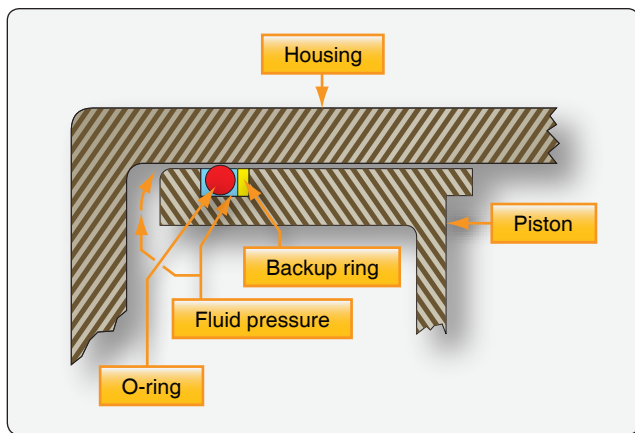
Back-up rings are used to keep O-rings from extruding into the space between the piston and the cylinder. They are positioned on the side of the O-ring away from the fluid pressure.
